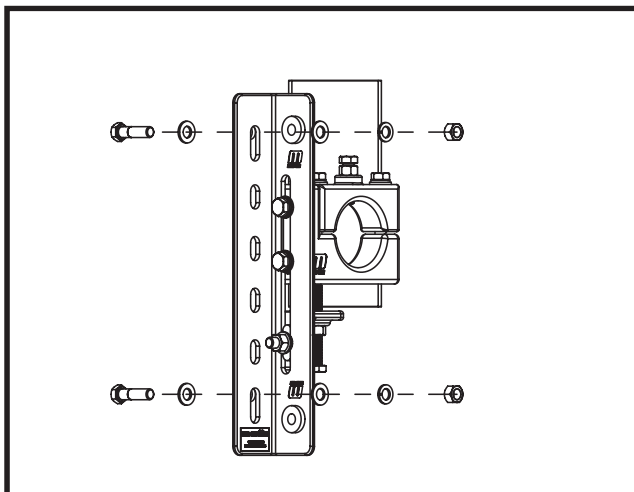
Martin® P2 Secondary Belt Cleaner HD Operator Bolt Tensioner Mount Bracket Hardware
